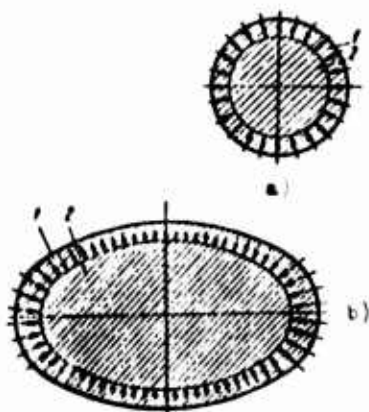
Nonuniform cooling of a casting; a) cylindrical; b) elliptic: 1 - external, colder layer; 2 - hot core of the casting.
